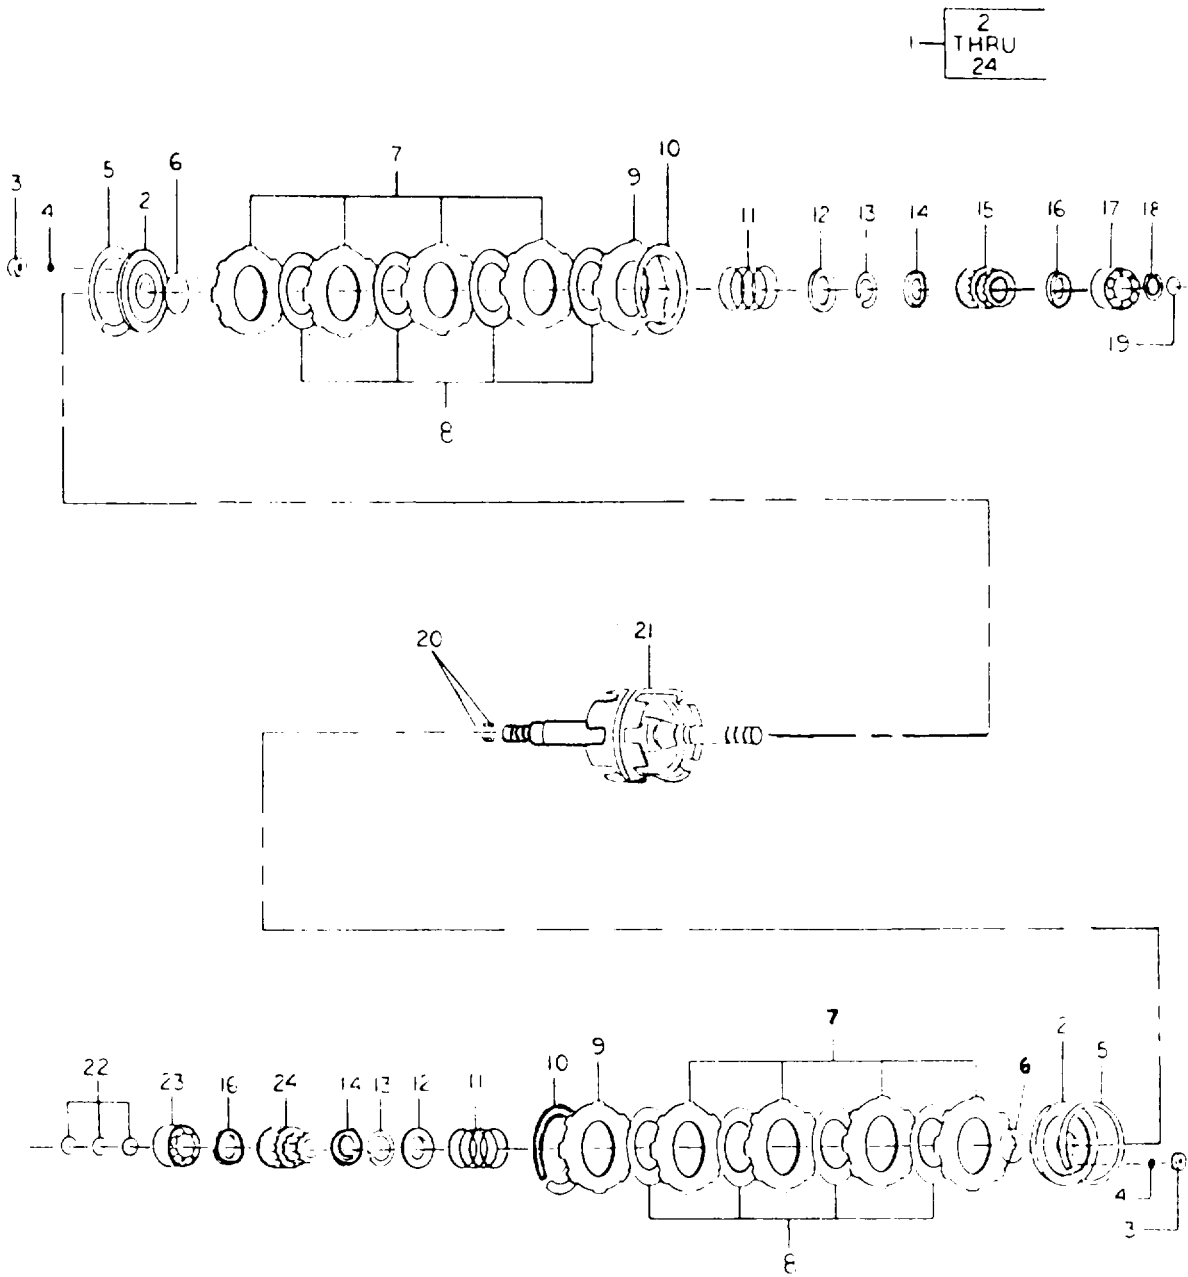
HYDRAULIC CLUTCH ASSEMBLY
